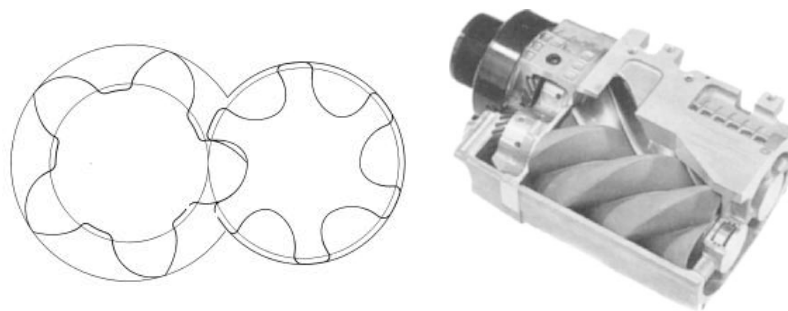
Left: example of screw compressor rotor profile [313] - Right: cutaway of screw compressor [146].
